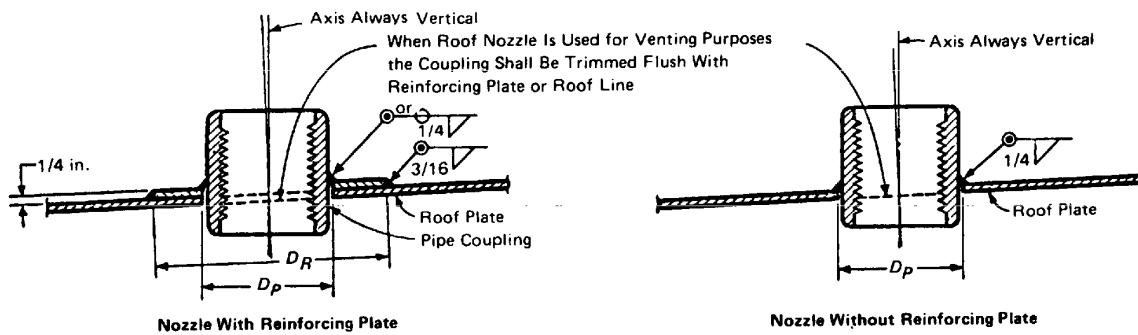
SCREWED OR SOCKET WELD ROOF NOZZLES
